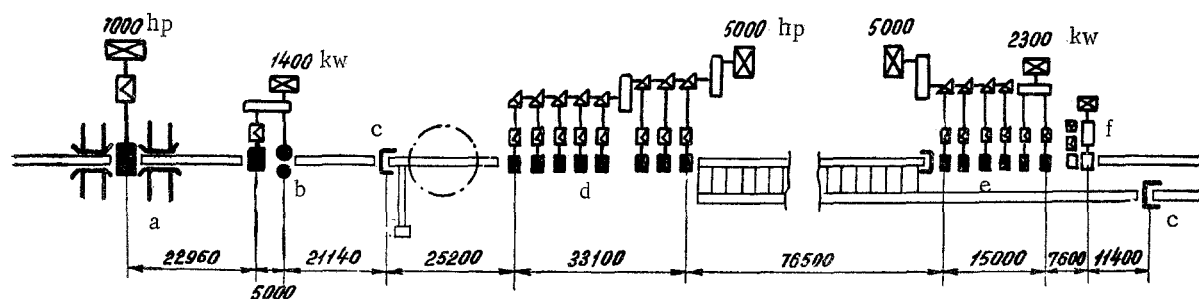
Layout of the equipment at blooming mill No. 2: a) 1150 reversing stand; b) additional nonreversing stands; c) shears; d) 630 continuous billet mill; e) 450 continuous billet mill; f) electrical planetary flying shears.
